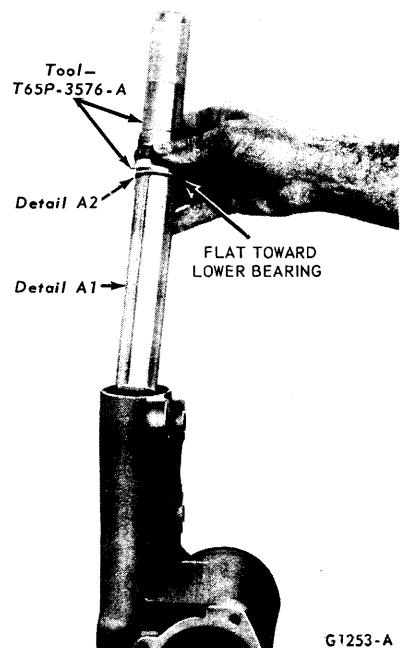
Installing Upper Bushing In Steering Gear Housing
